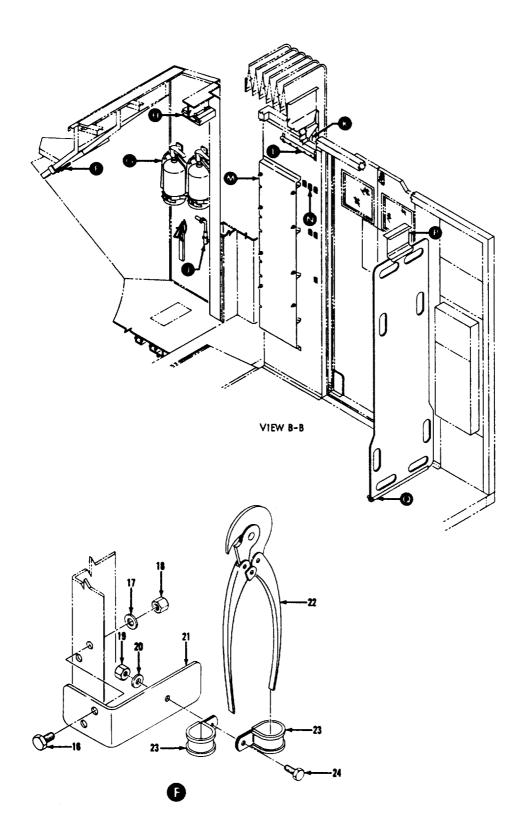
Equipment Installation (Sheet 3 of 25)
